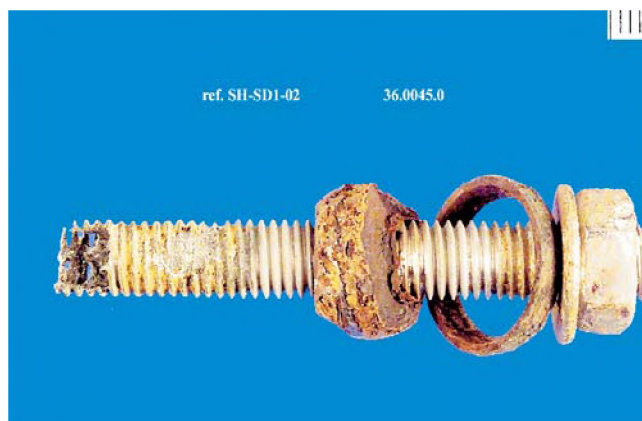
Detail of liner-sensor joint SH-SD1-01.
